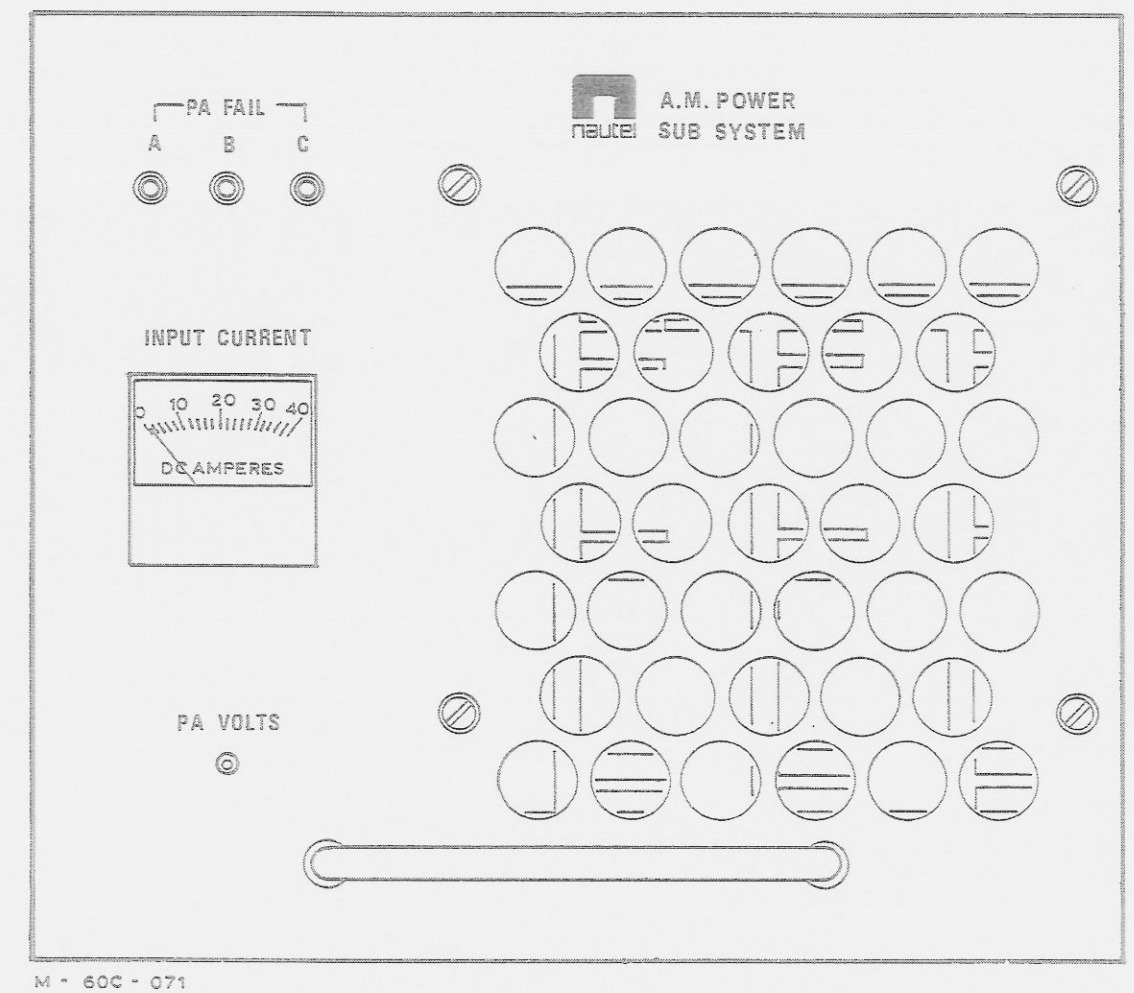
Assembly Detail - NAP10/1 1.25 kW AM Power Subsystem Module (Front View)
